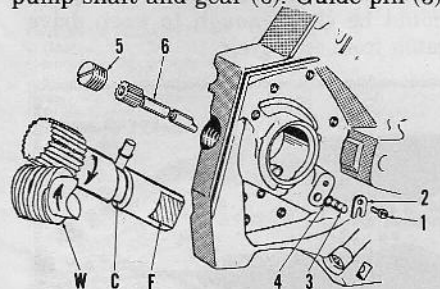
Exploded view of the automatic chain oiler pump. Pump shaft and gear (6) is turned by a worm gear on crankshaft.
